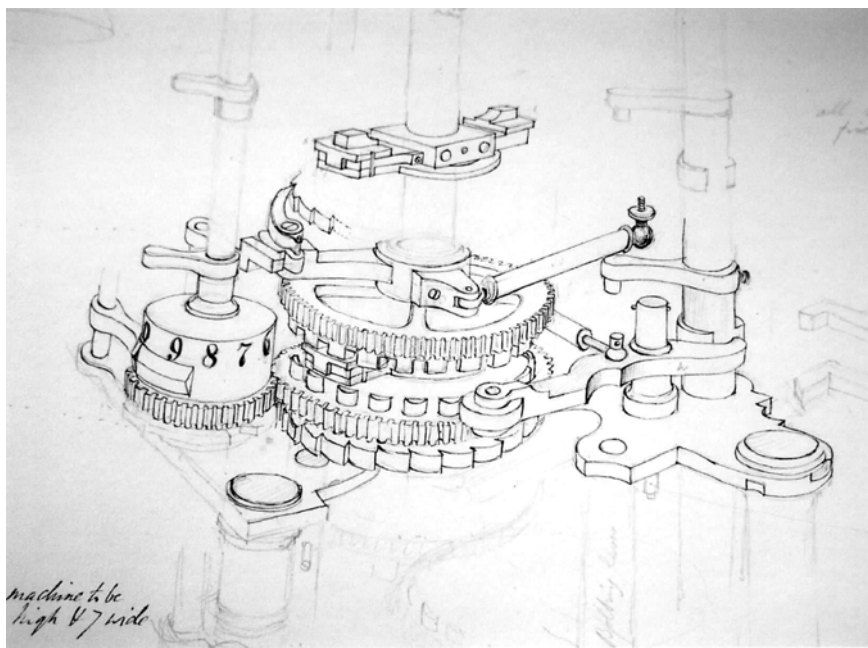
Drawing of Willis of mechanism for Babbage's Difference Machine calculator. (Courtesy, Cambridge Univ. Engineering Library)
